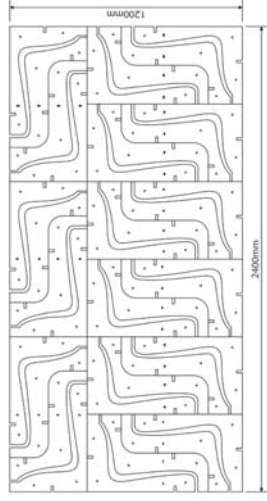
Nested mould components fit exactly on a 1200mm x 2400mm sheet of MDF.
